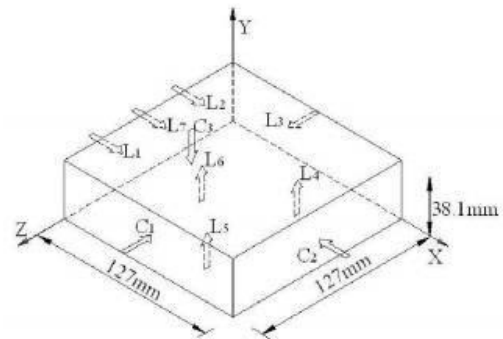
Workpiece-fixture configuration with 3-3-1 locating scheme
